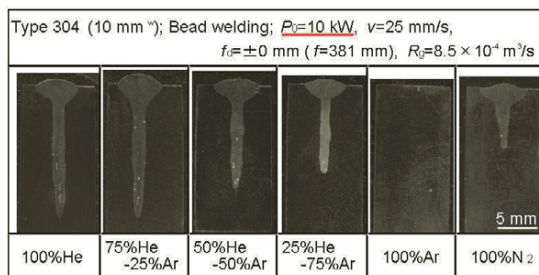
Cross sections of Type 304 weld beads produced with 10 kW CO₂ laser in different shielding gases
